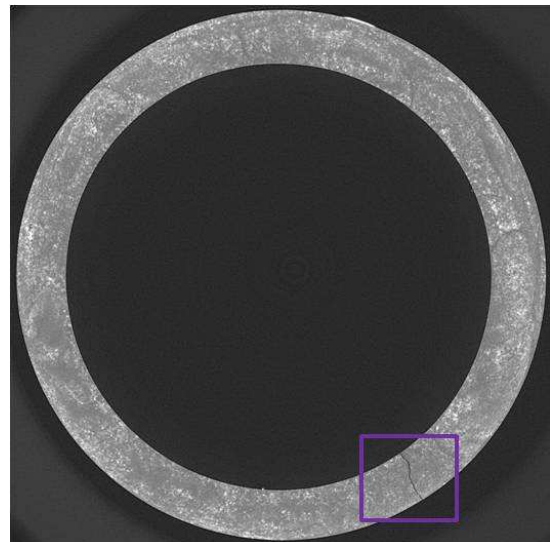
CT slice of a CFRP tube after torsion test showing crack formed during failure.
